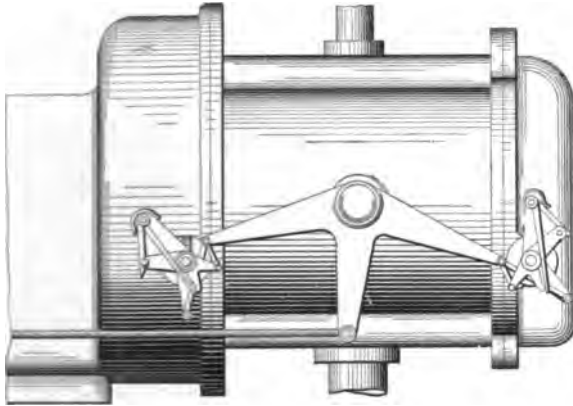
ELEVATION OF AIR CYLINDER AND WRIST-PLATE MECHANISM.
